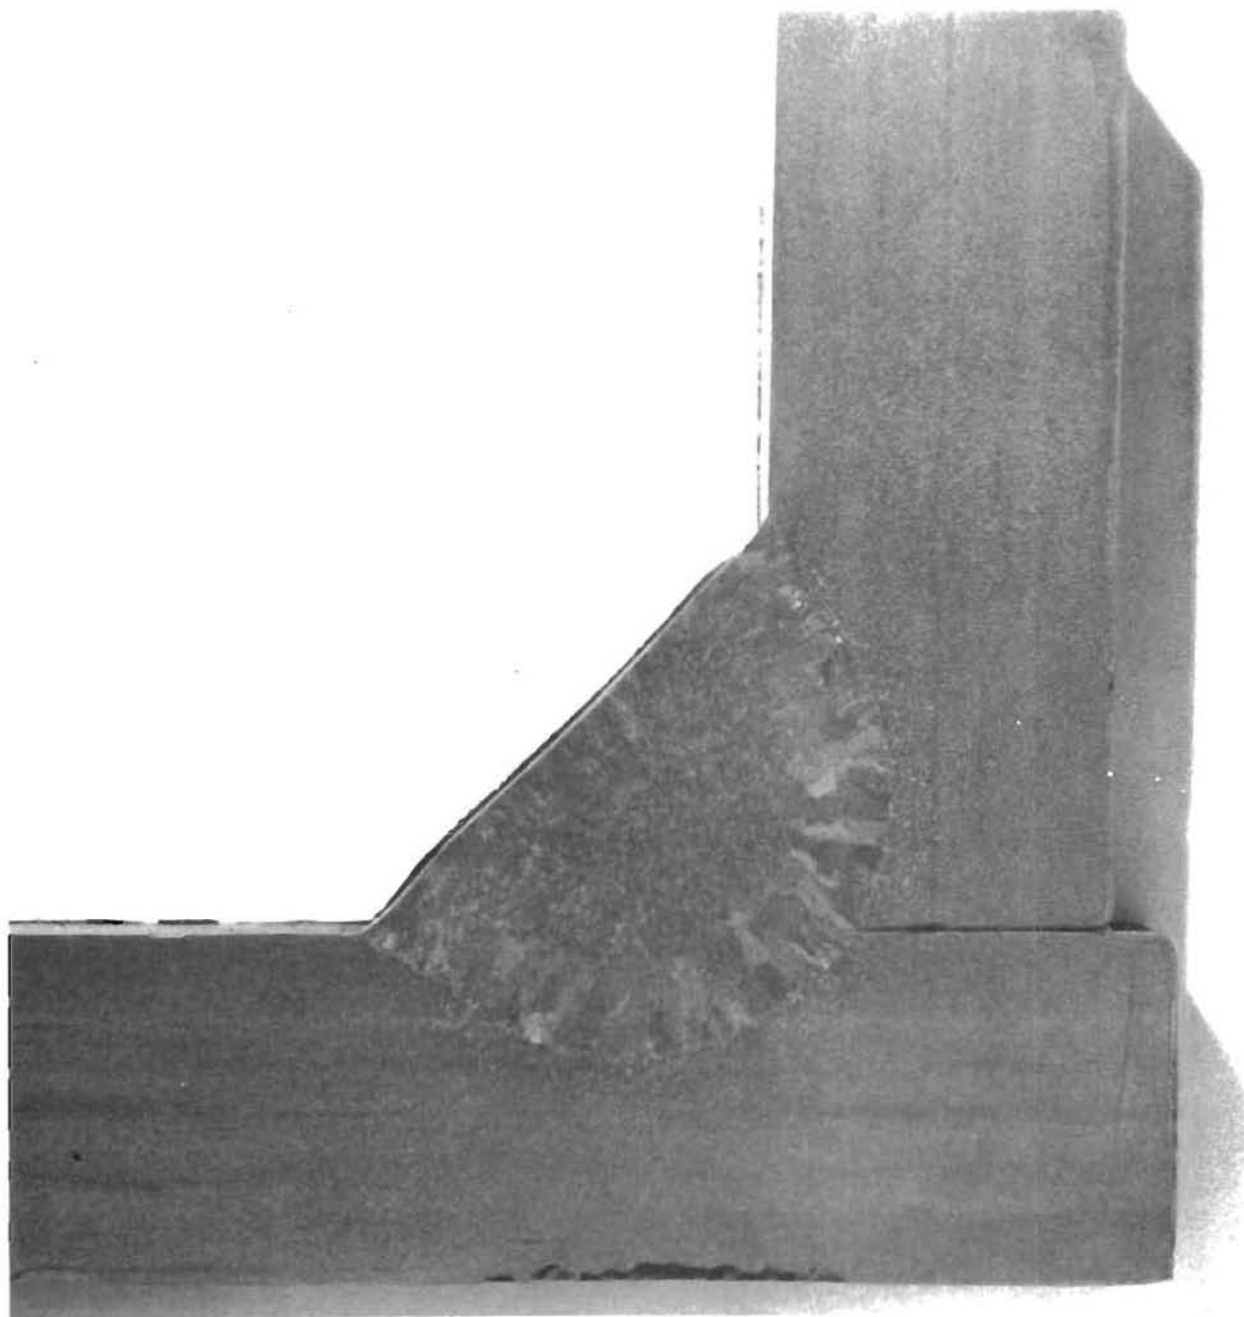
A 1-inch fillet weld done vertically up in a single pass.
